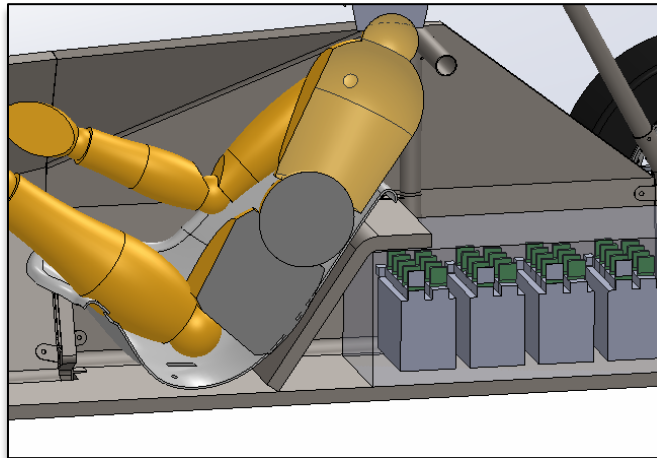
Structural Firewall Placement Between Driver and Battery Box
